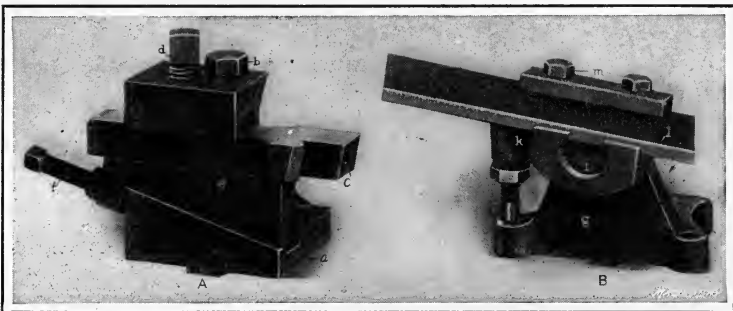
Open-side Forming Tool-holder and Standard Universal Cut-off Tool-holder for Cut-off Tools of the Blade Type
